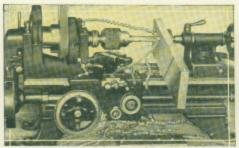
Drilling a Piece of Flat Steel Held Against Drill Pad in Tailstock.
